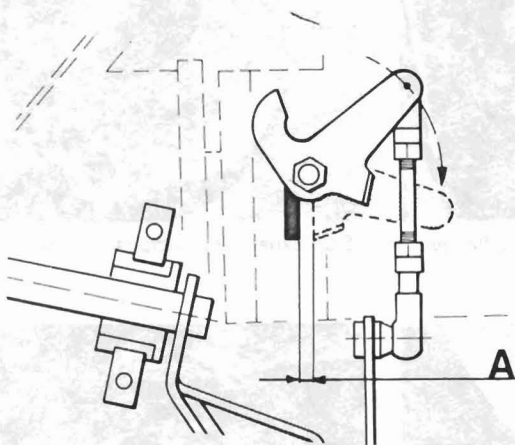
Throttle control clearance at carburettor (Sec 14)
